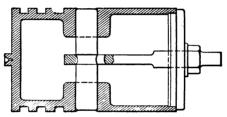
Gas engine piston, showing arrangement for chucking for grinding.
